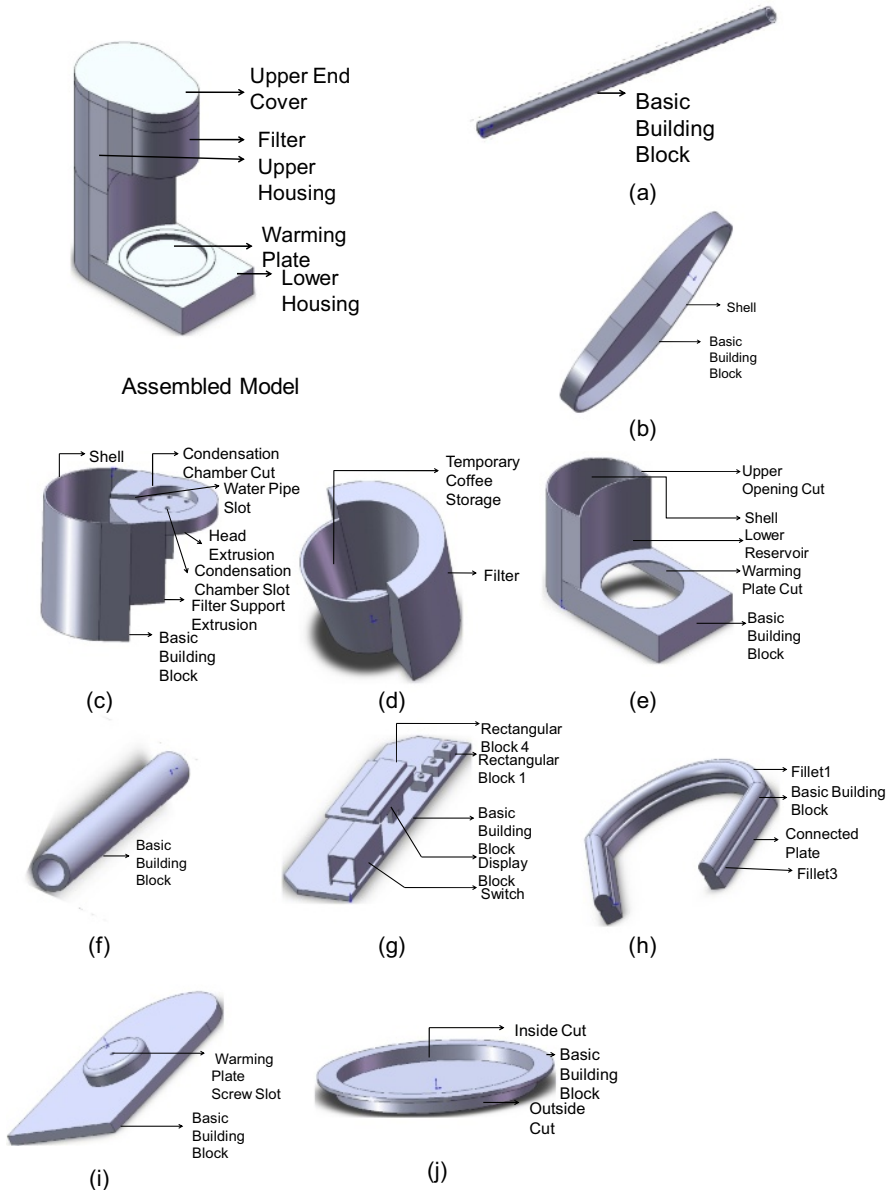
Coffeemaker 1 assembly and component: condensing tube (a), upper end cover (b), upper housing (c), filter (d), lower housing (e), heating tube (f), electric circuit (g), heater (h), lower end cover (i), and warming plate (j)
